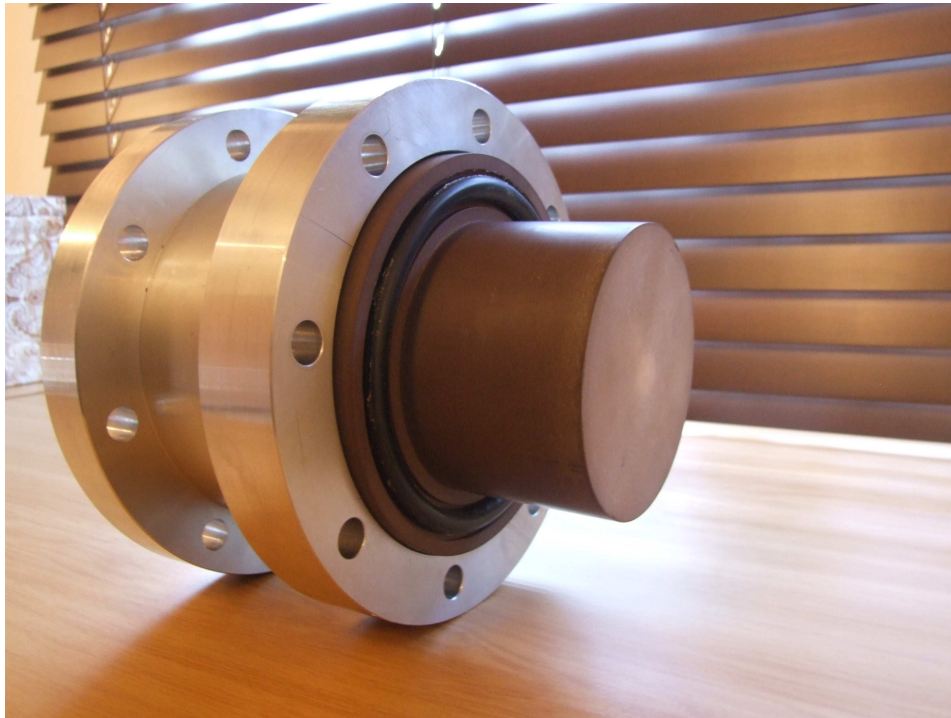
Designed and manufactured aluminium flange fitting to clamp epoxy resin plug onto service port
